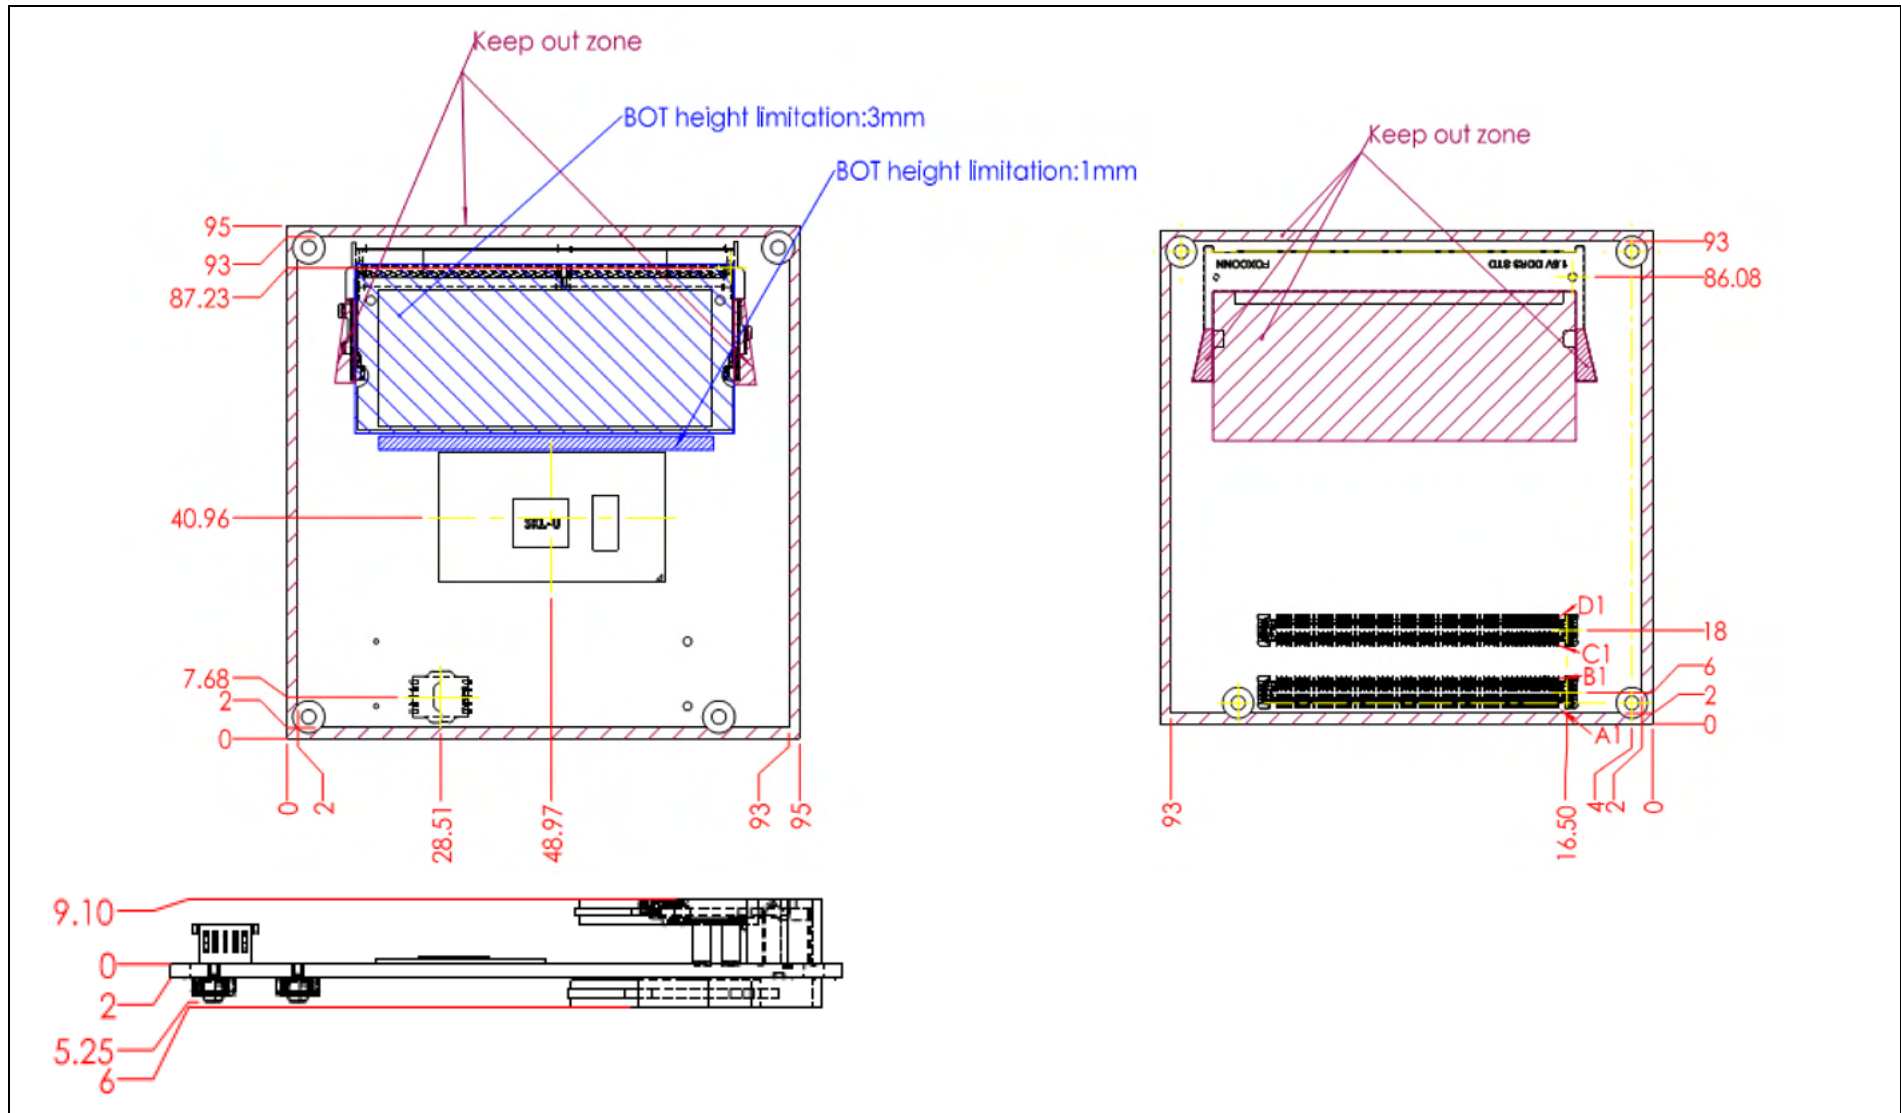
Mechanical Dimensions - Top & BOT & Assembly
